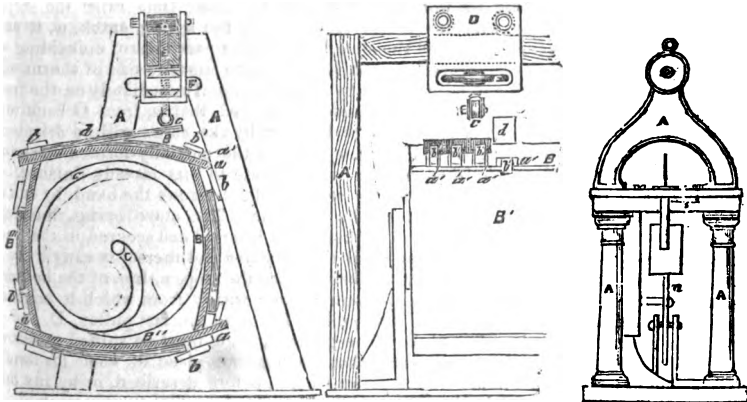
of the accompanying engravings is a sectional elevation, and fig. 2 a front elevation, of so much of a bending machine as is necessary to explain the same. A A is a stout frame; B B' B" B''' are four sides of the hollow curved vessel, over which the staves, or blanks for forming staves, are bent. The inventor prefers to form these sides of boiler plate, and shape them to the curve of the intended stave. In the engraving the side, B, has the requisite curve for a stave for a puncheon; B' for a barrel; B" for a hoghead; and B''' for a kilderkin. The vessel is mounted upon an axis so as to be capable of being turned as required. C is a hot water, hot air, or steam pipe for keeping the sides of the vessel hot. *a a a a'* are stop blocks riveted to the side plates; and *b b b b'*, sliding blocks, for the purpose of retaining the blanks or staves on the side plates when bent, as hereafter explained. D is a travelling block for carrying a screw, E, and hand wheel, F; at the bottom of the screw is a friction roller, *c*. The operation is as follows:—The vessel being heated, or prior to being heated, a blank, *d*, saturated with liquid or steam or not, is placed against the stop, *a*, and the sliding block, *b*, brought over the end to retain it; the opposite end of the blank is brought down by turning down the pressure screw, until the whole length of the blank is brought in contact with the curved side of the vessel, when the end so brought down comes against or near to the stop, *a'*, and the sliding block, *b'*, is brought over and secures it in that position. The pressure screw is turned in the reverse direction, and the travelling block moved on to repeat the operation on another blank. Instead of the blanks being brought down by screw pressure where they are not of too great thickness, a lever may be employed, fitted with a lining shaped to the curve of the intended stave. The blanks are kept on the heated curved surface until set to the curve, when they are removed to a similar cold curved surface, and kept some time after they have set; or they may remain upon the first curved surface, from which the heating medium may be withdrawn until they are cold.
